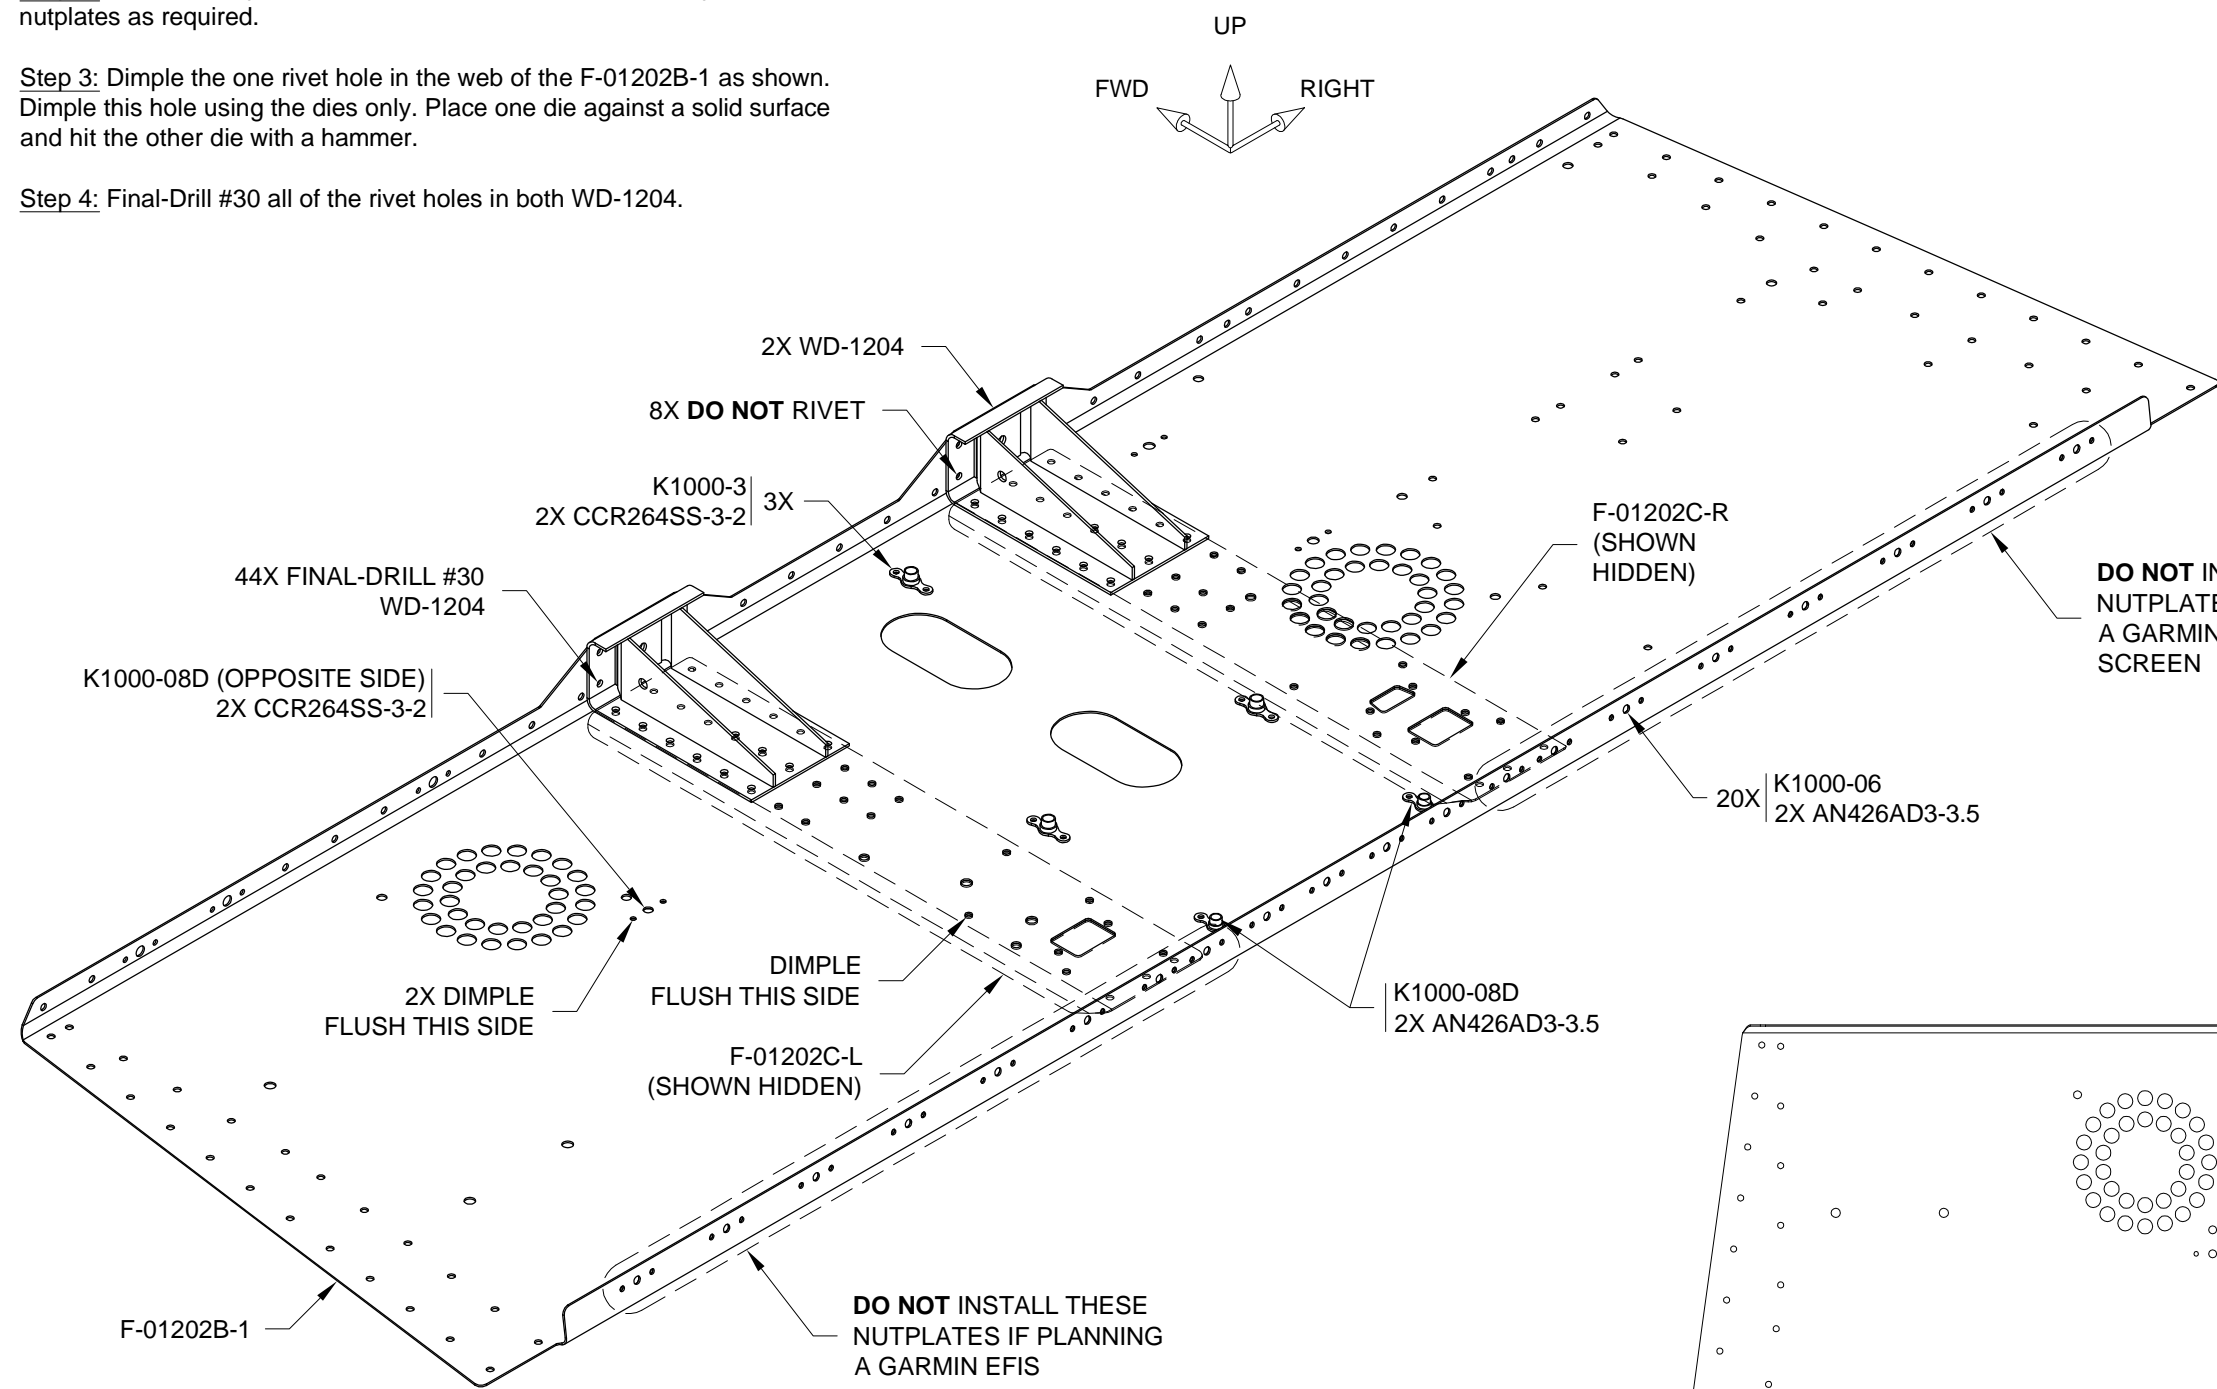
RIVETING THE PANEL BASE CHANNELS
